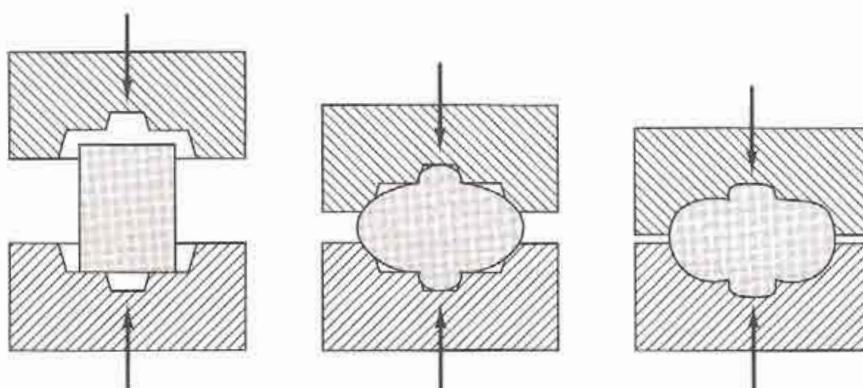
Schematic of the impression-die forging process, showing partial die filling and the beginning of flash formation in the center sketch and the final shape with flash in the right-hand sketch.
